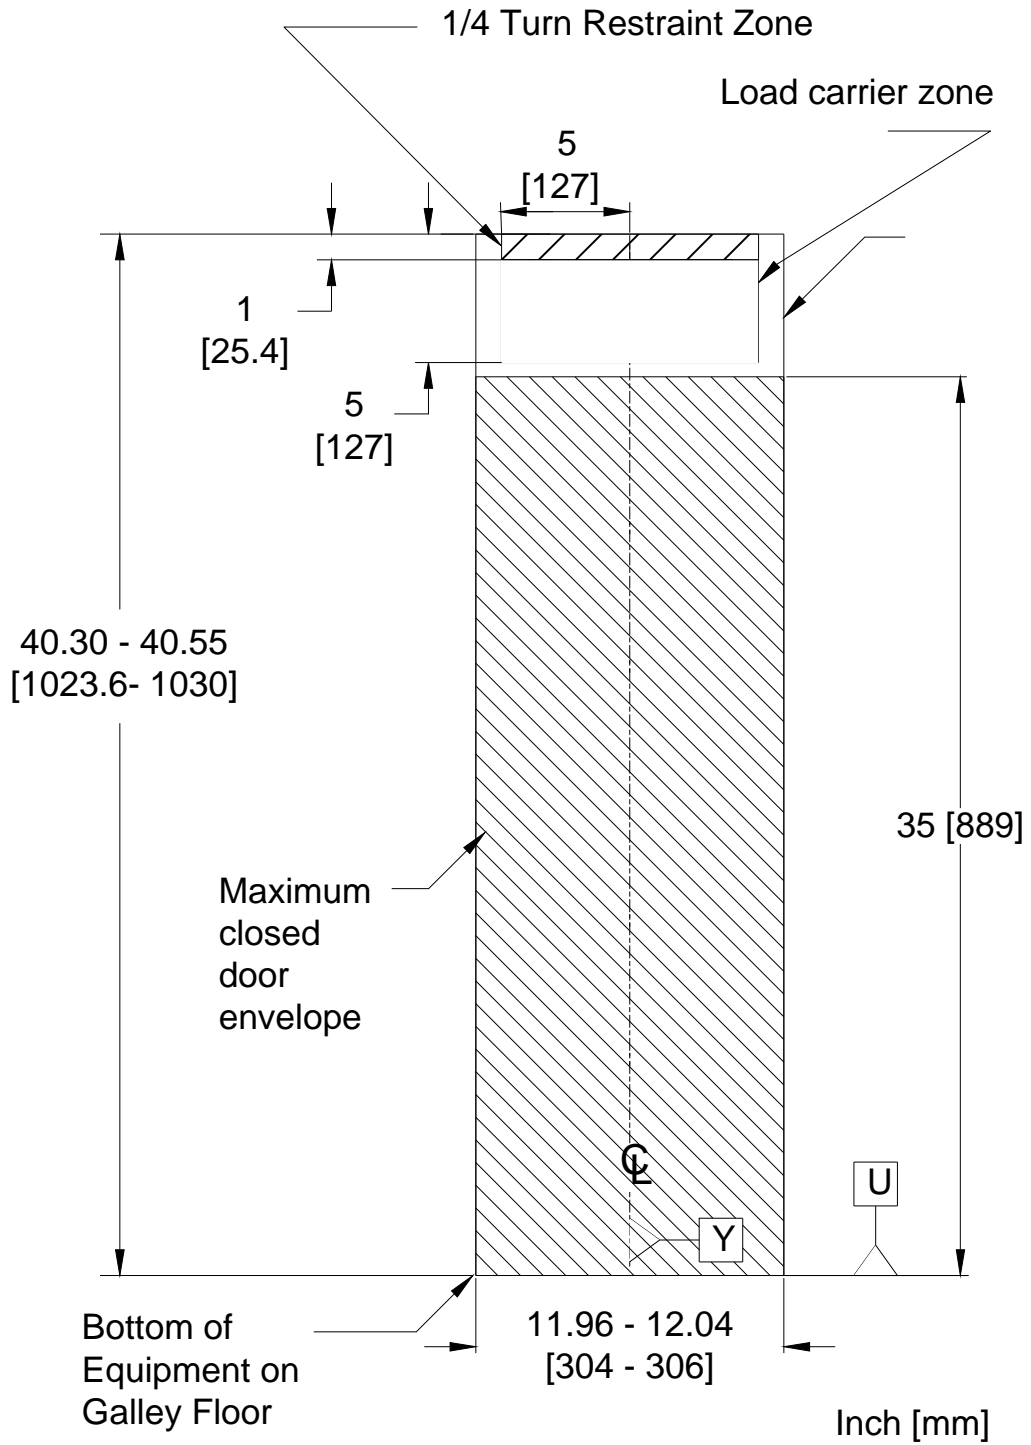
A – GAIN Size 3 Equipment Standard Dimensions Drawing - Front View
